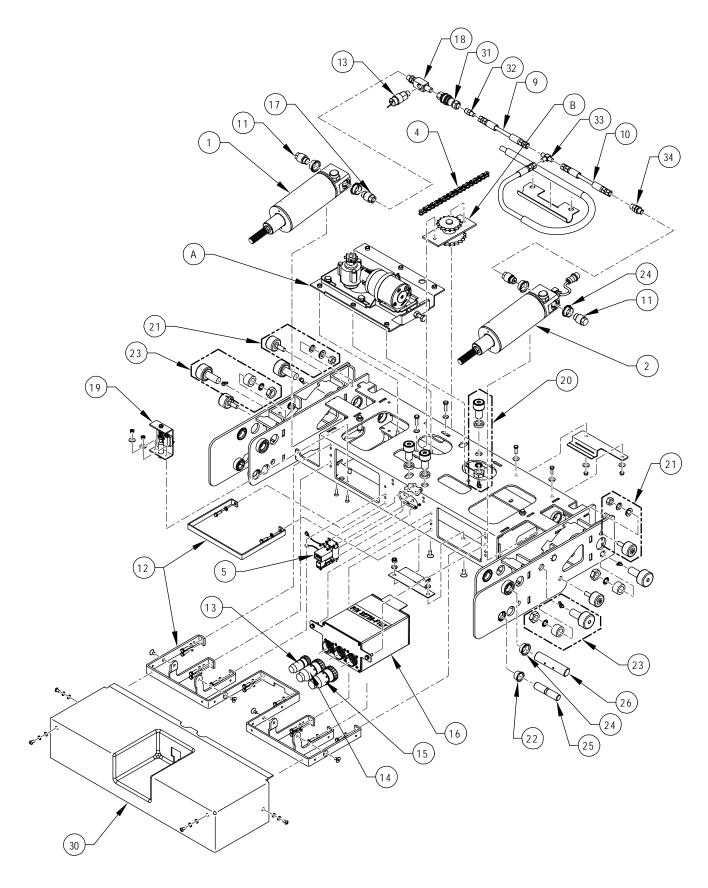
F10X-SERIES CARRIAGE ASSEMBLY (SHEET 1 OF 2)
